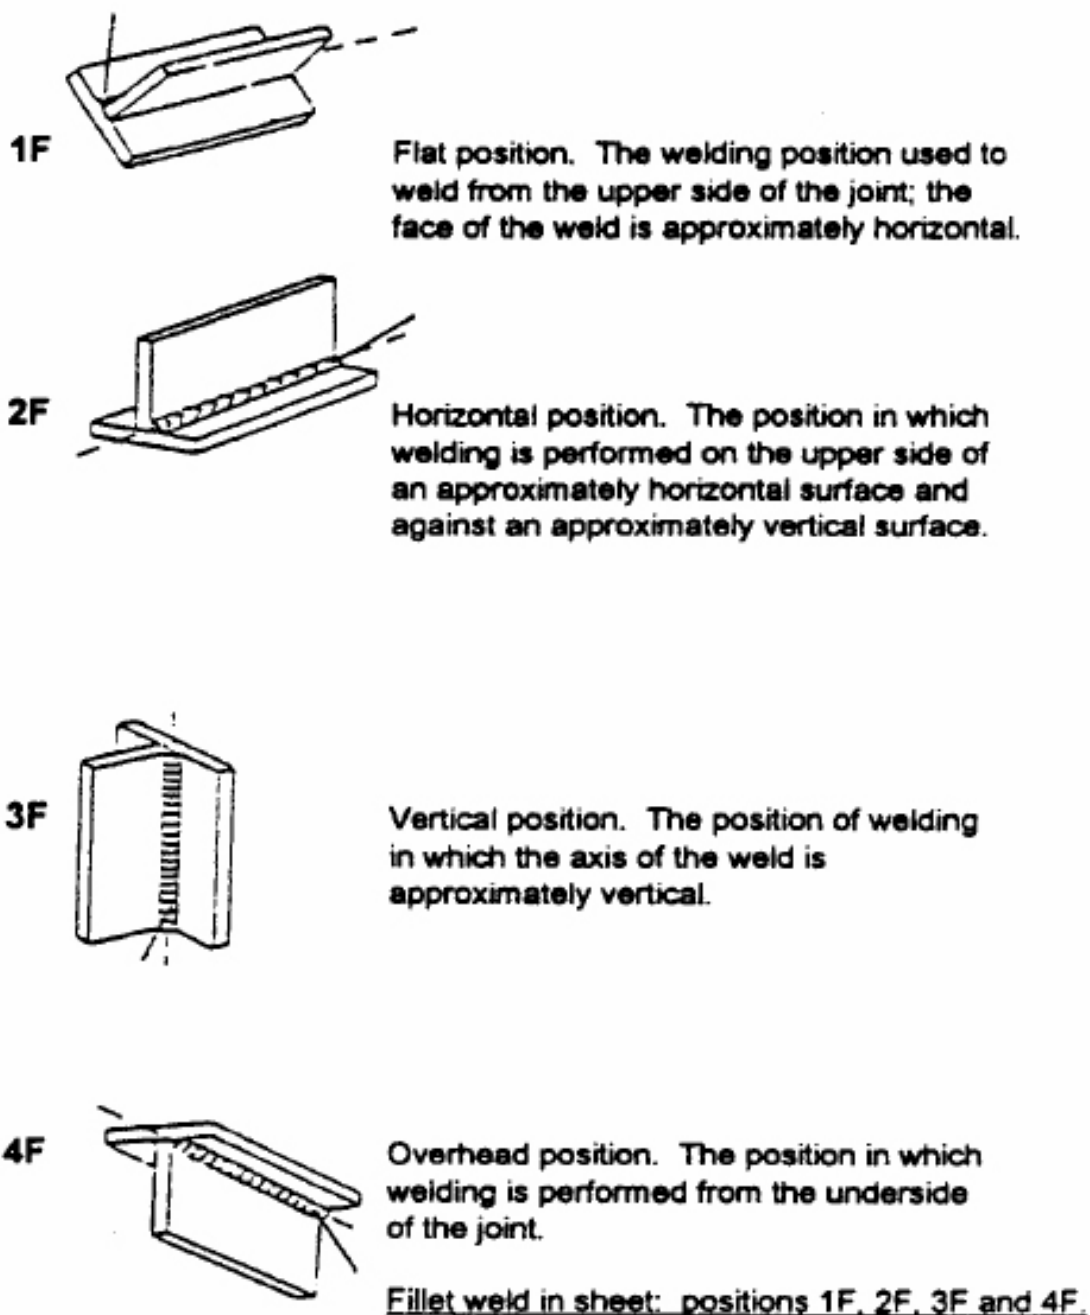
Weld Positions (From Table 1) (Sheet 2)
